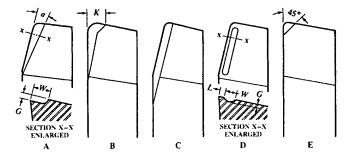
Different Forms of Chipbreakers for Turning Tools
